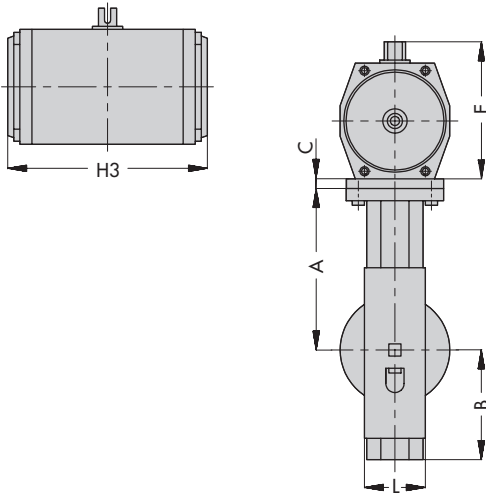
Type 3335/31a Pneumatic Butterfly Valve
